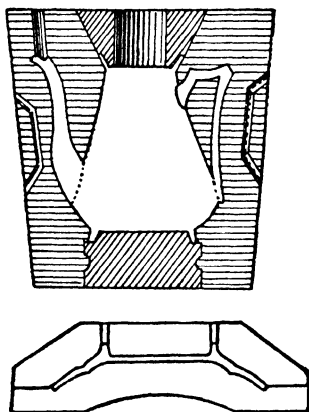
Casting Moulds in section : (a) Teapot ; (b) Plate.
